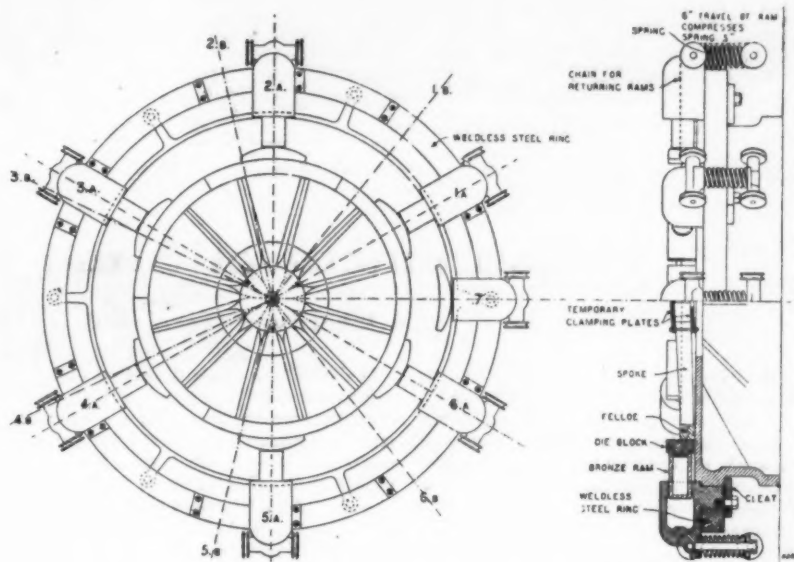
Set of Hydraulic Rams Used for Building Wood Wheels.
